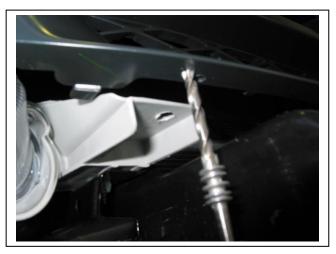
Drivers side Shown. Shown drilling lower lip of grille
